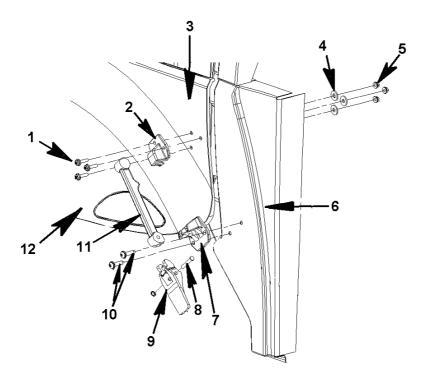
Hood / Fender Latch Attachment — Driver Side Shown
